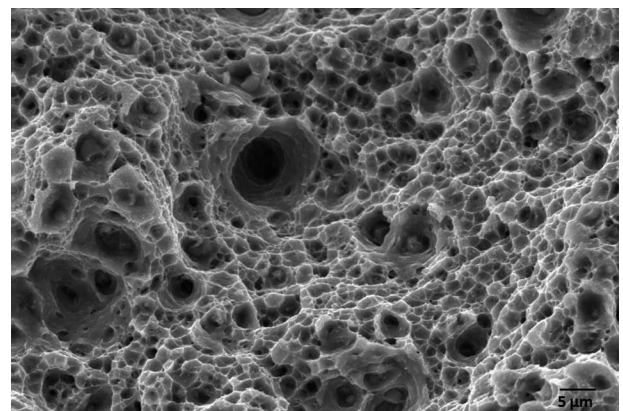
Fracture surface of a room temperature tensile-tested V65 (equivalent to AA 2014) wire rod rolled at 300°C. Note fine equiaxed dimples
